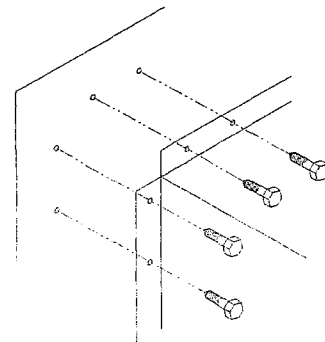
Fan-Side Sound Attenuator Assembly Details
